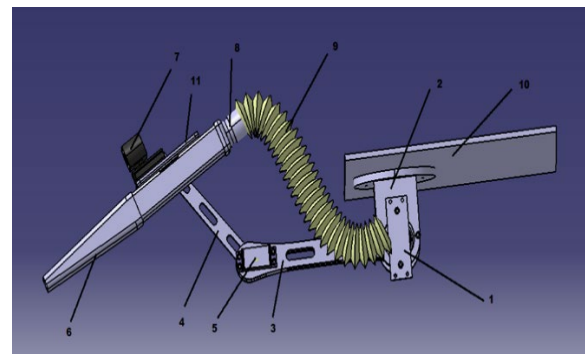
Side view of the 3D model: 1 – plate; 2 – basis; 3- long shoulder; 4 – short shoulder; 6 – working tip; 7 – camera; 8 – rear tip; 9 – aluminium sleeve; 10 – plate; 11 – working plate.
